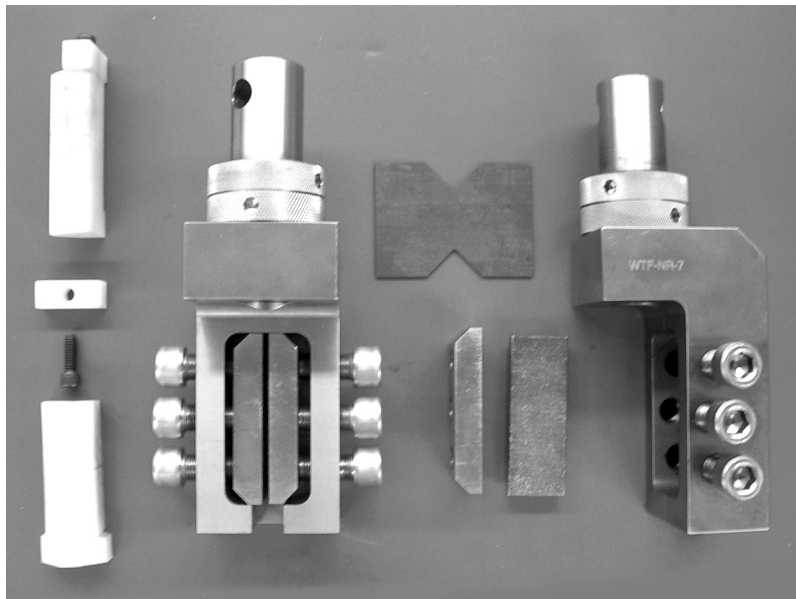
Partially Assembled Fixture with Specimen and Spacer Blocks
